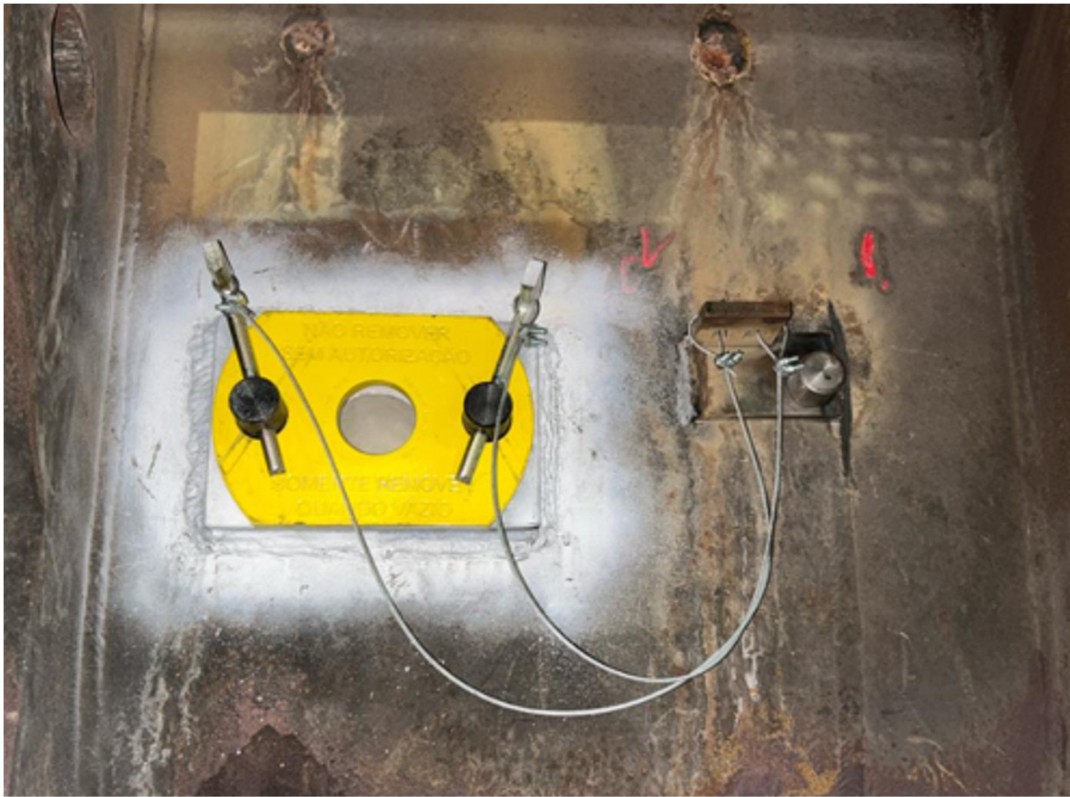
Position of the flange installed on the tundish shell at Usiminas.
